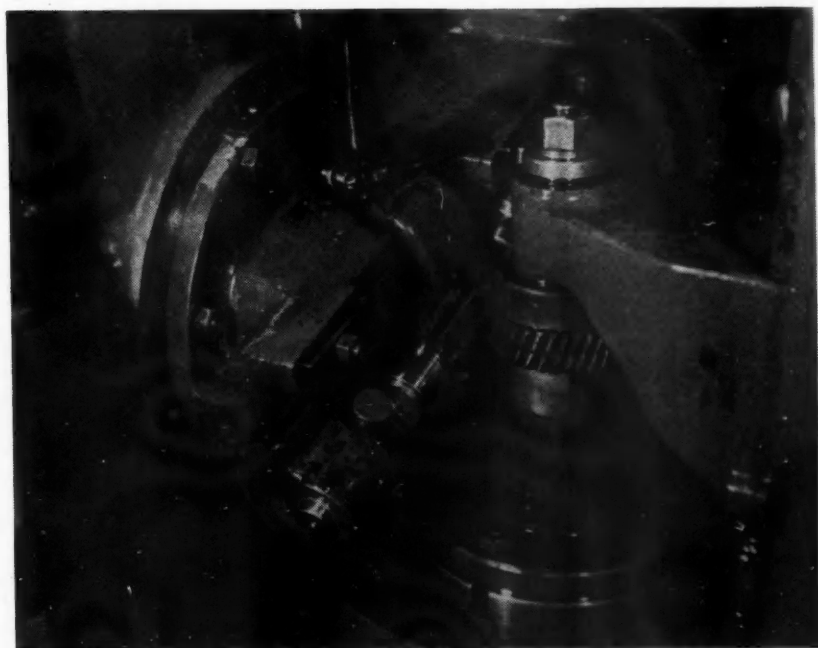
The use of the shaving process makes it possible to hob gears in one operation instead of rough and finish hobbing. Here is shown a detail of one of the Gould and Eberhard gear hobbers, hobbing two low speed gears at one time, back to back. Standardization on one make of machine tool for each operation is another important reason for the consistent accuracy of Buick transmission gears.
